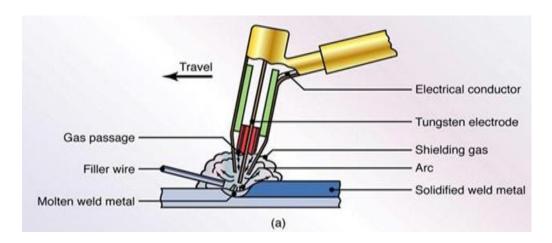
1 - Tungsten Inert Gas Arc Welding Process. [A]
